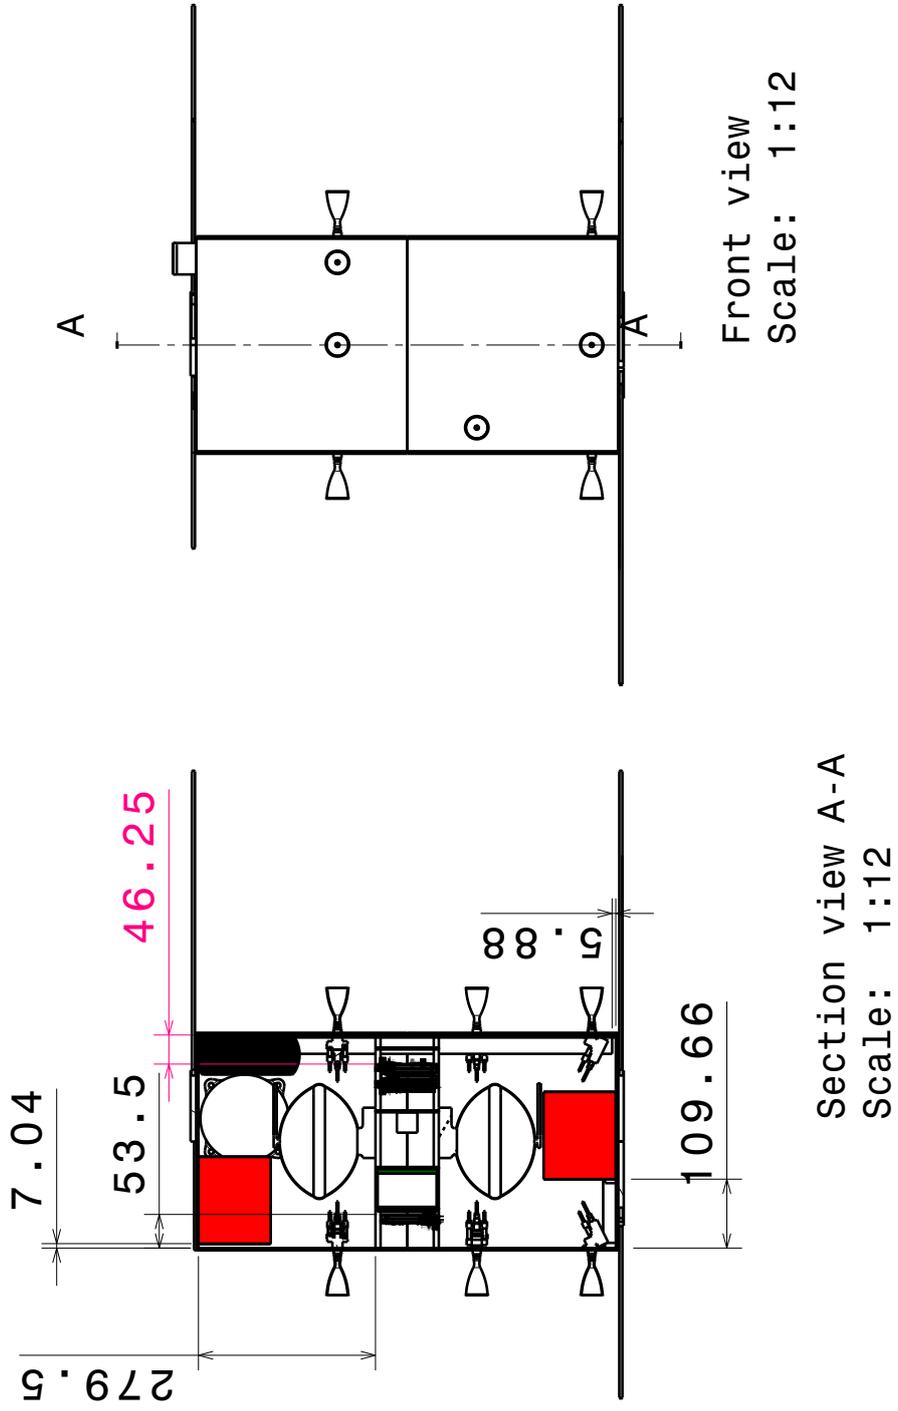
Technical Drawing of the Components Inside the Spacecraft Bus.
